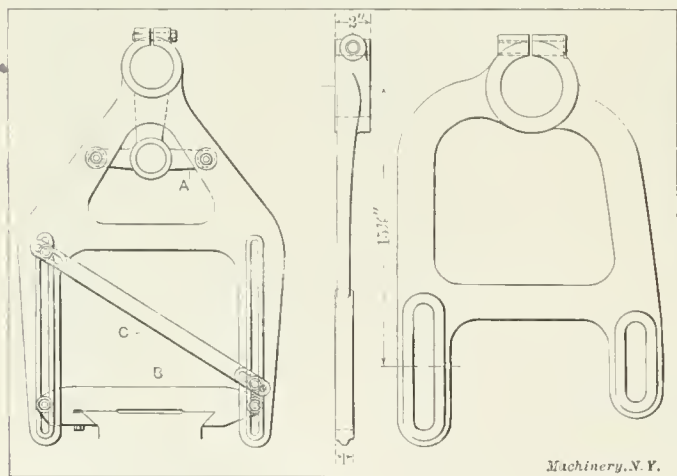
Truss Form of Bracing. Fig. 15. Brace with Curved Slots.
